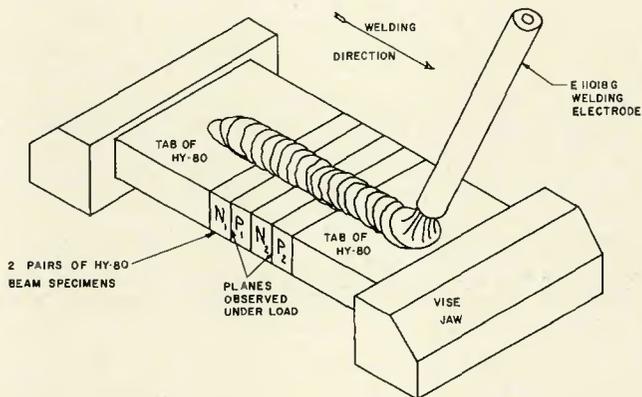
Schematic illustration showing the welding of cold cracking test specimens
